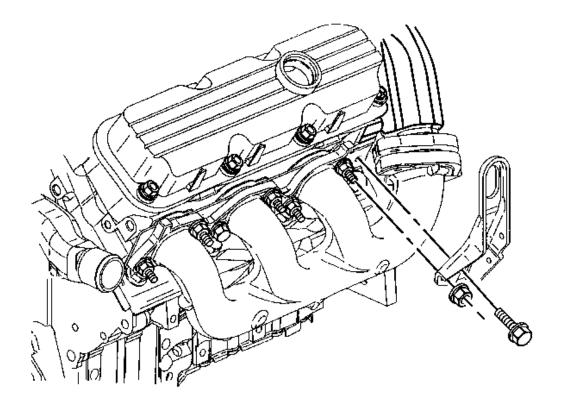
Left Engine Lift Bracket (3.8L) Courtesy of GENERAL MOTORS CORP.
